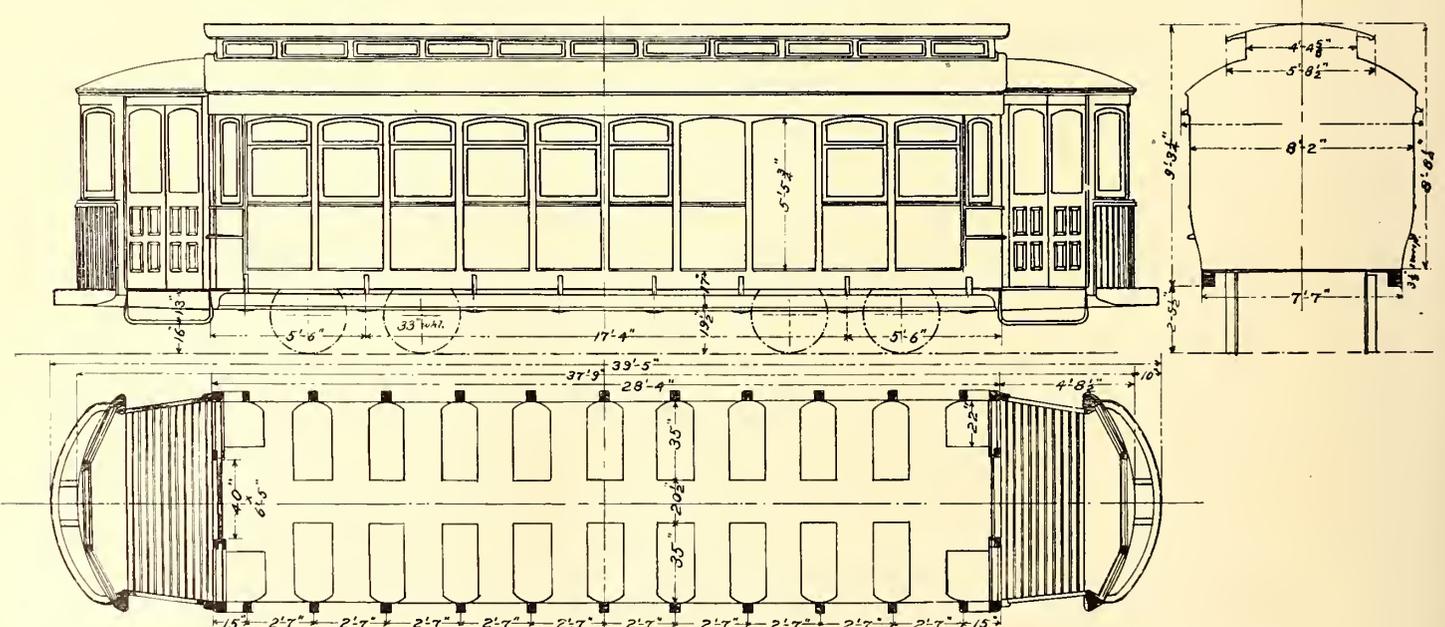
PLAN, SIDE ELEVATION AND END ELEVATION OF STANDARD DOUBLE-TRUCK CONVERTIBLE CAR
